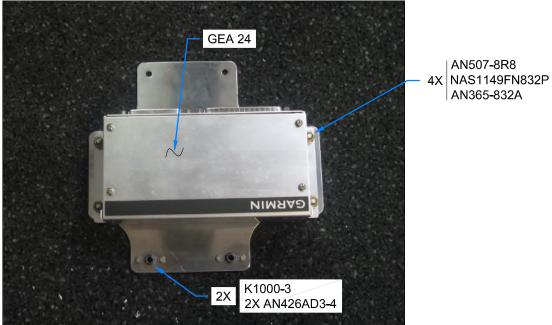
ATTACHING THE GEA 24 TO THE ATTACH PLATE
